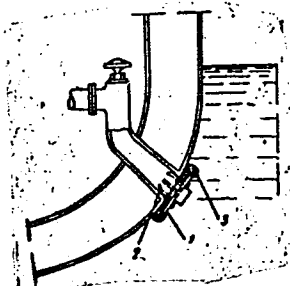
1 - sealing disk; 2 - bracing springs; 3 - layer of sealing compound.
